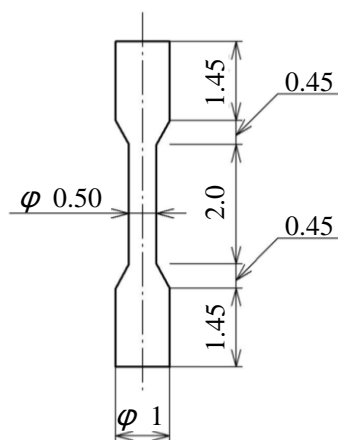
Shape and dimensions of the miniature size specimen. (unit: mm)
